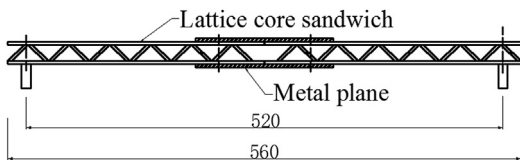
The bolted splice joint structure between two lattice core sandwich panels.
